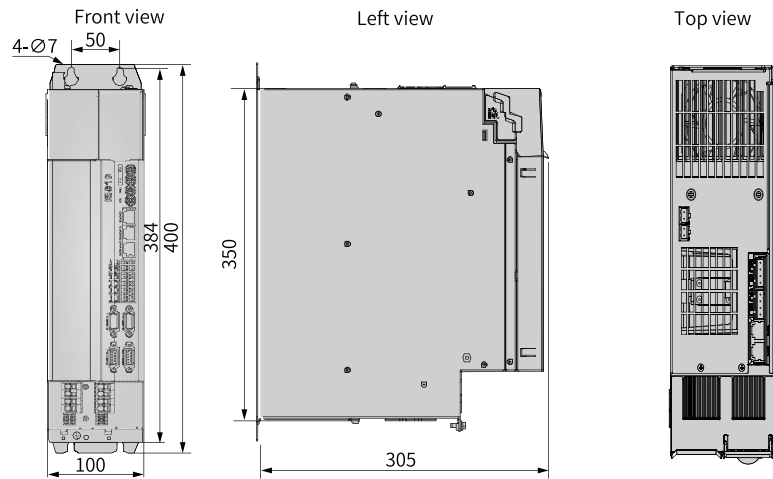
Outline dimensions of the size-2 (unit: mm)
